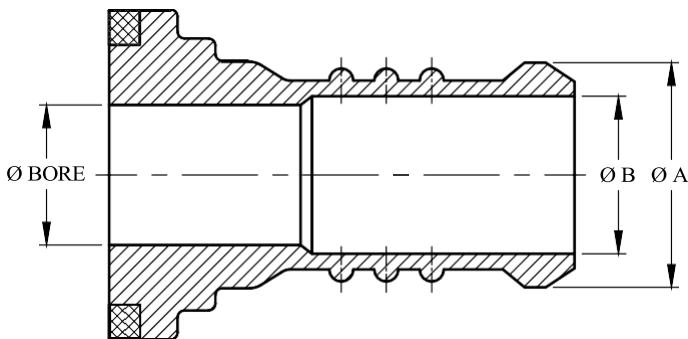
E CRIMPING END CONFIGURATION (TYPE 1)
